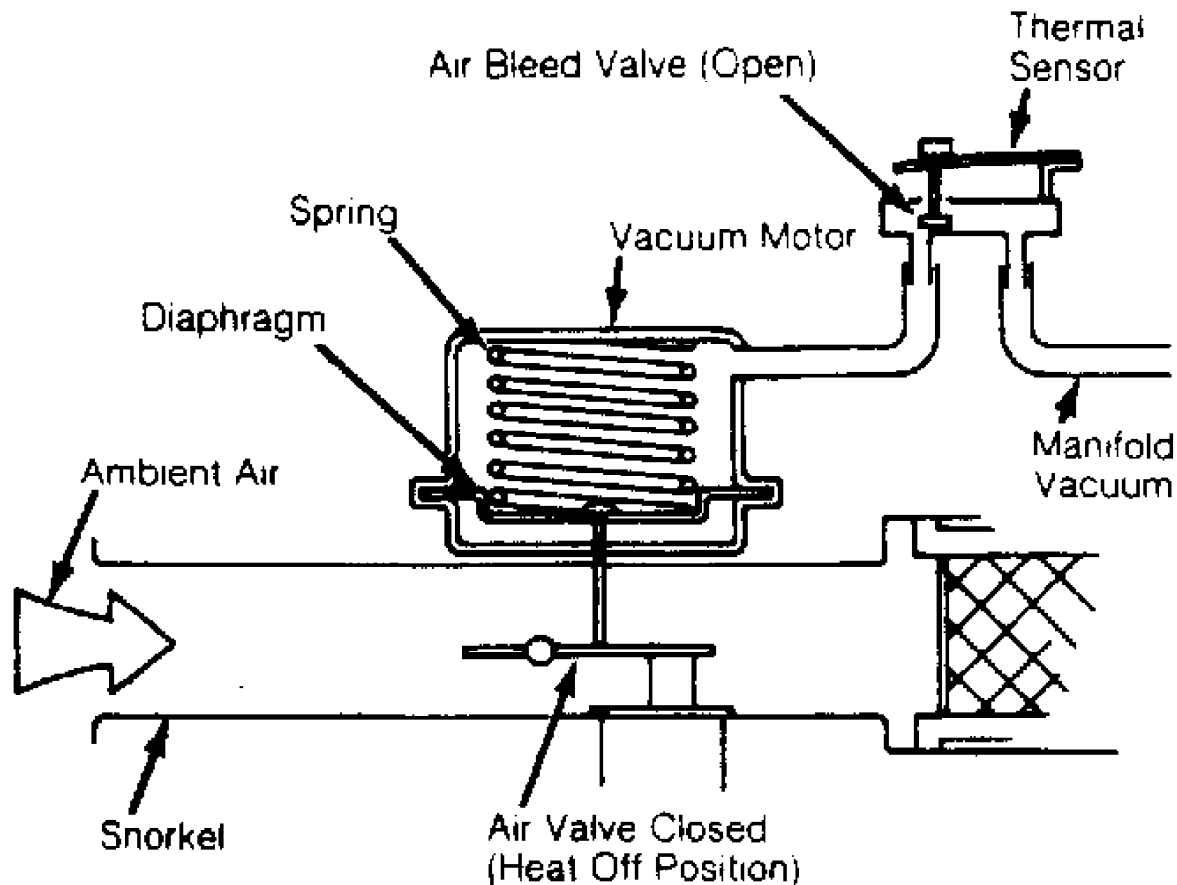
Cutaway View of Thermostatic Air Cleaner Assembly
